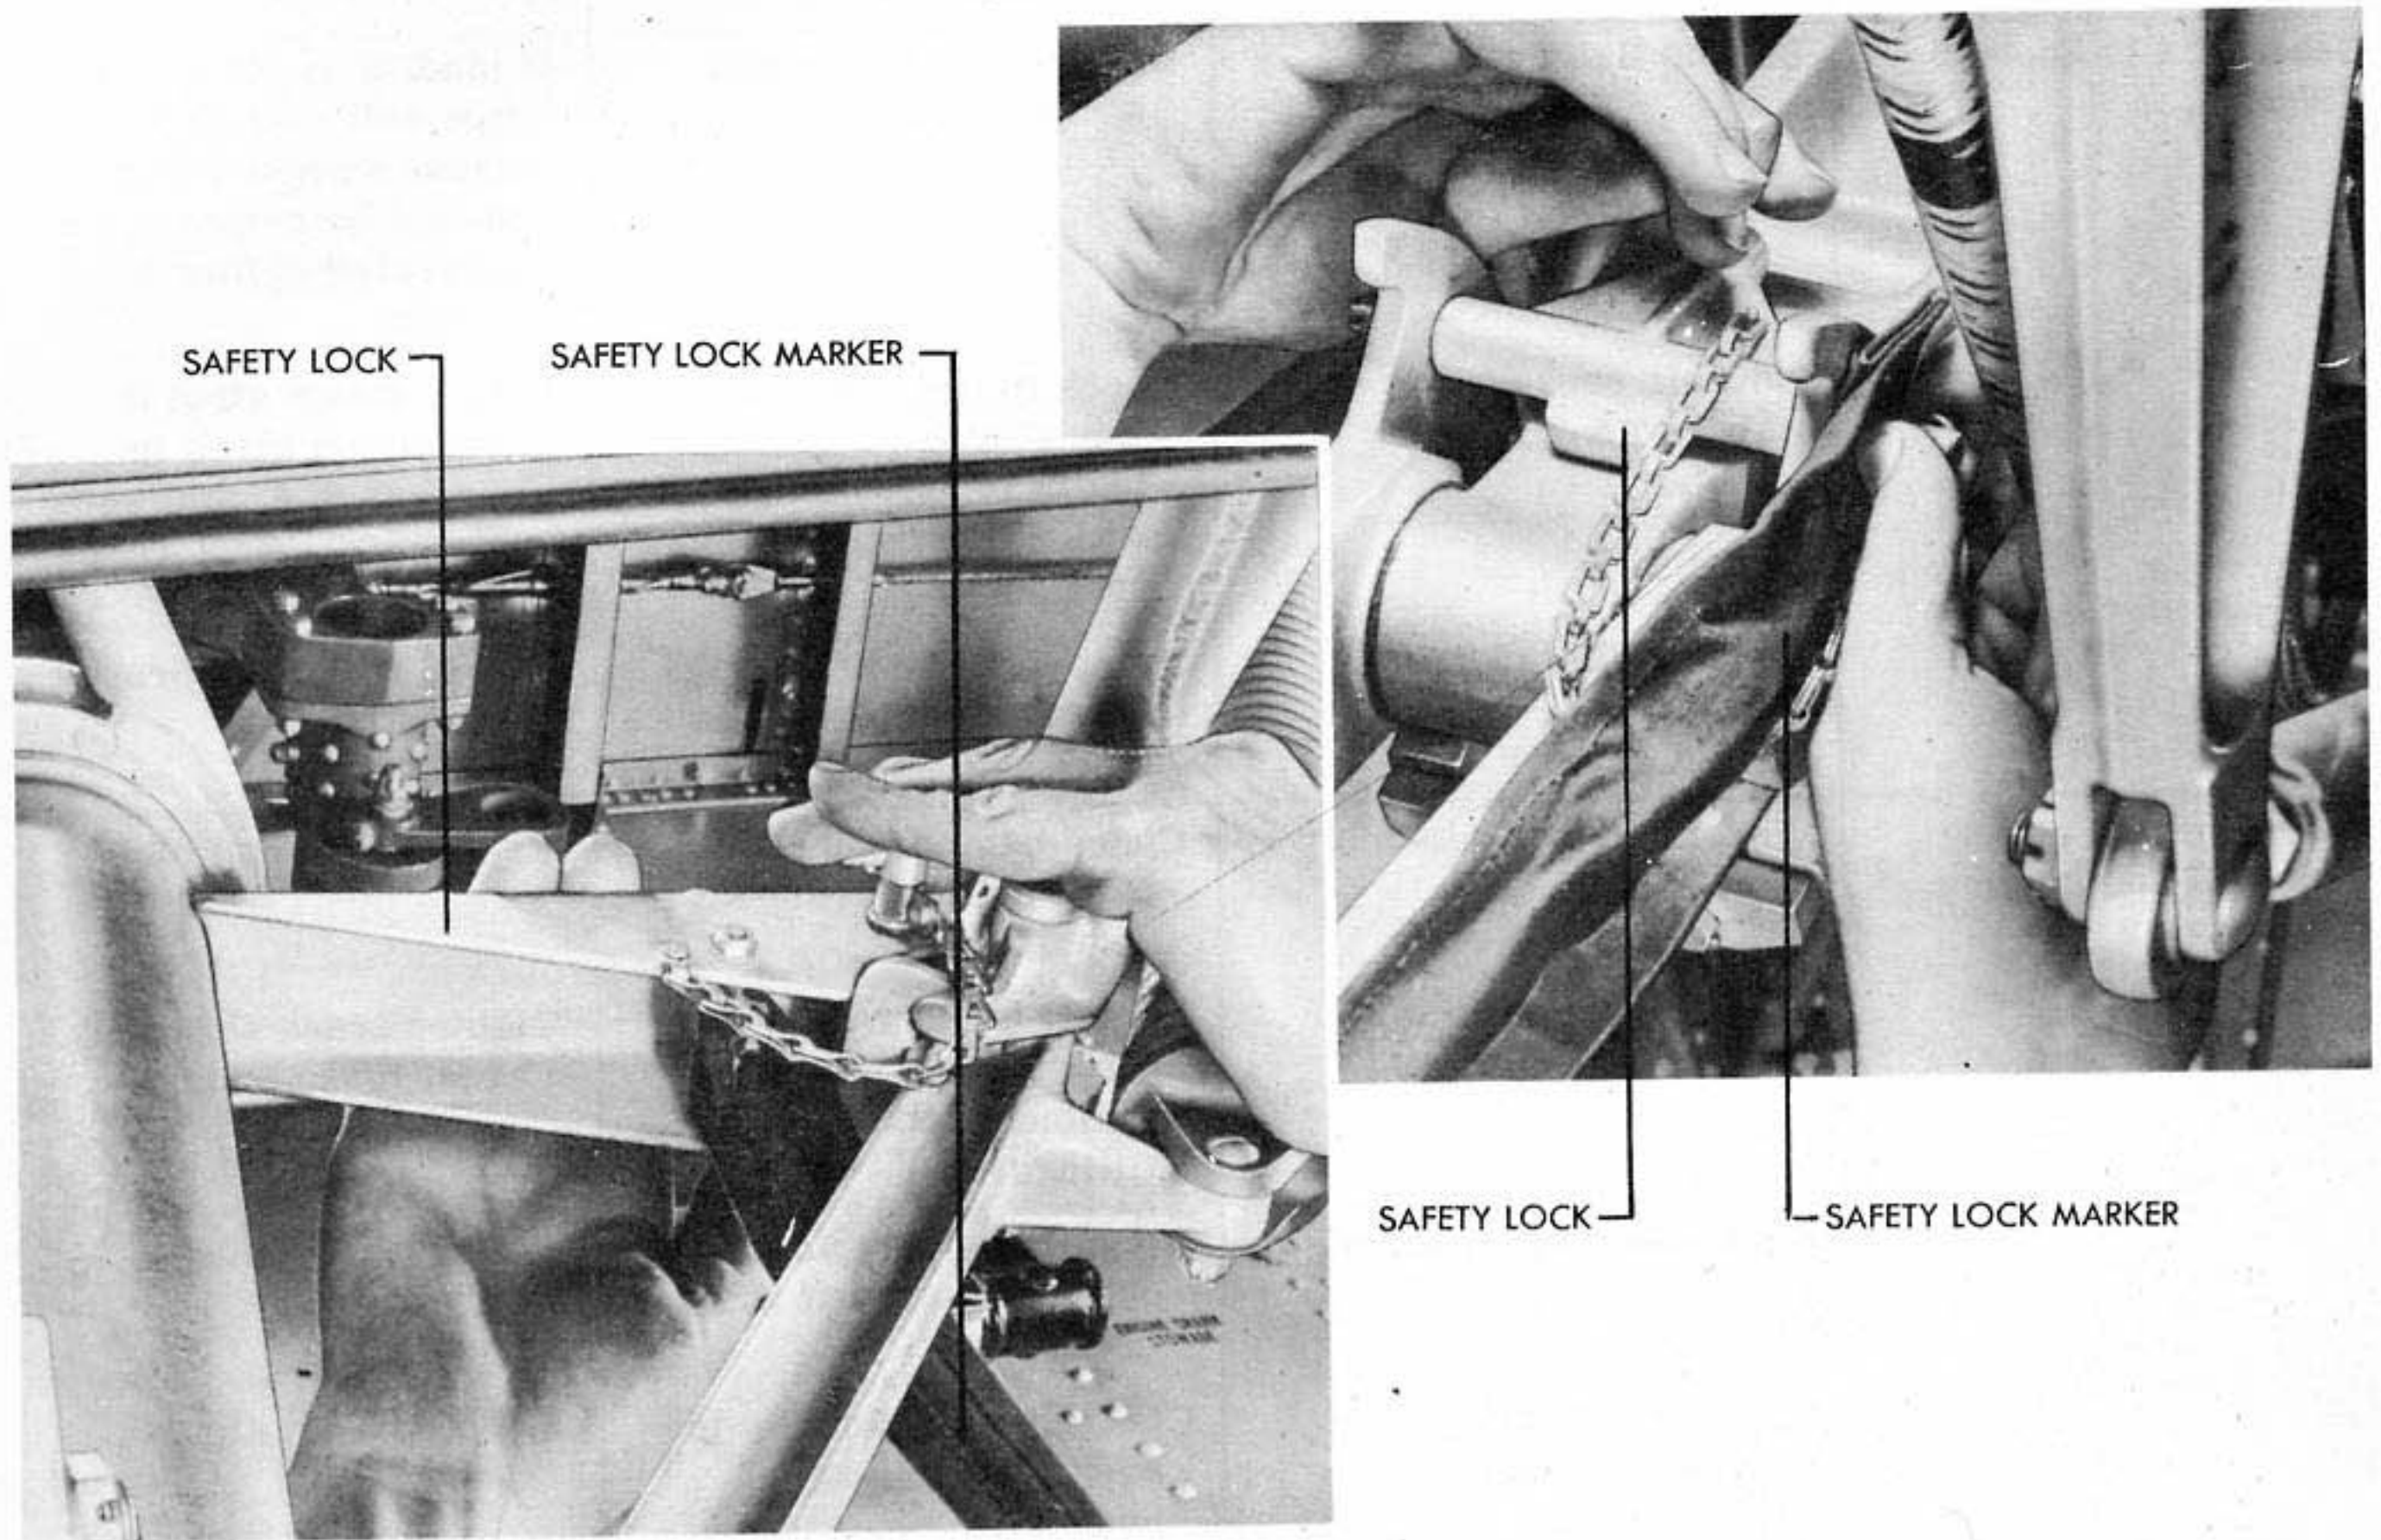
INSTALLING ALIGHTING GEAR SAFETY LOCK
